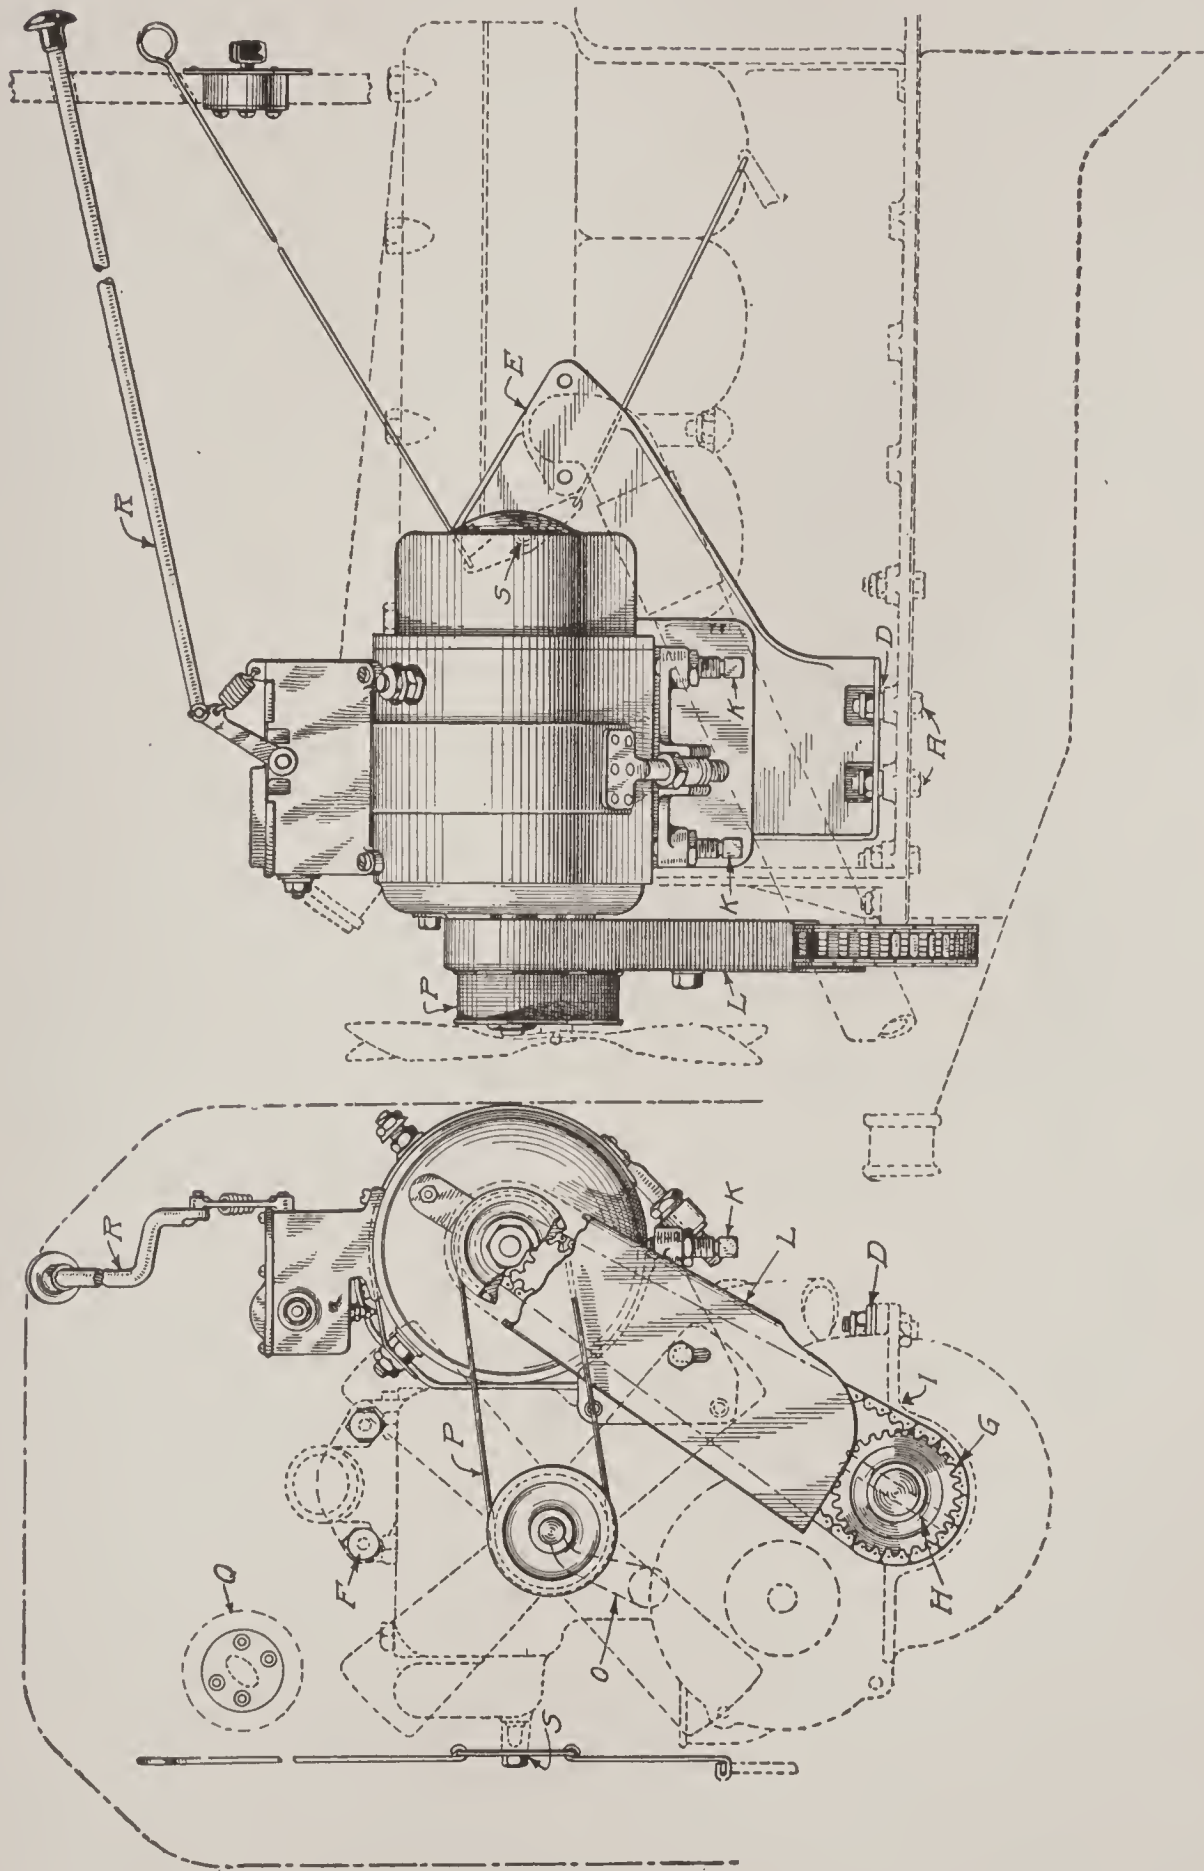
Working Drawing for Installing Chain-Driven Genemotor
